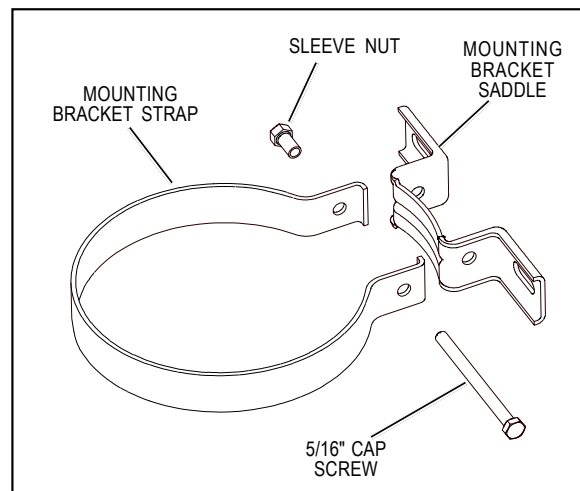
UPPER MOUNTING BRACKET AND STRAP
